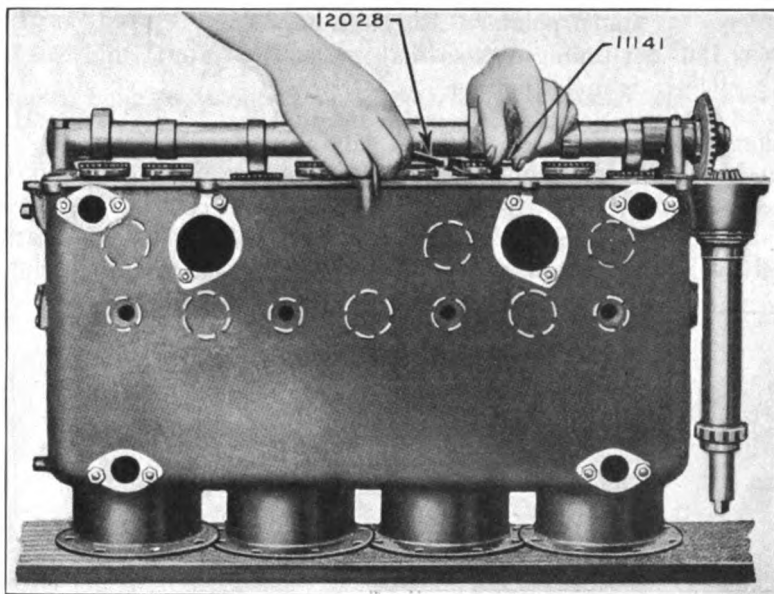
Adjusting valve tappet clearance, models A, I and E.
